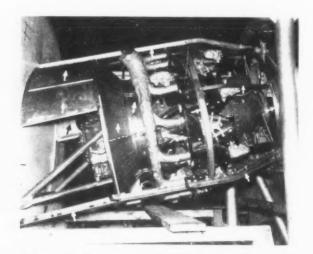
Titanium engine shroud parts now under test by Piasecki Helicopter Corp. Spot welded and riveted fabrication methods are employed. All material is RC-70.
